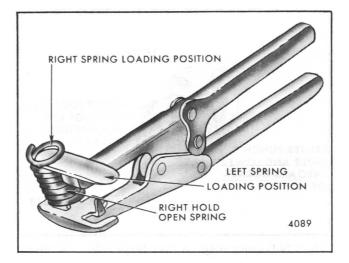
Hold-Open Spring, Loading Positions Using Tool J-23497 or Equivalent - "X" Styles
